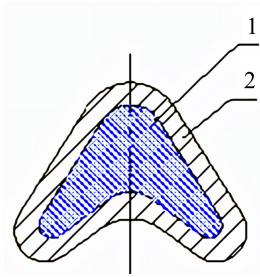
Typical shape of copper cutting cable. 1: Explosives; 2: Copper skins
